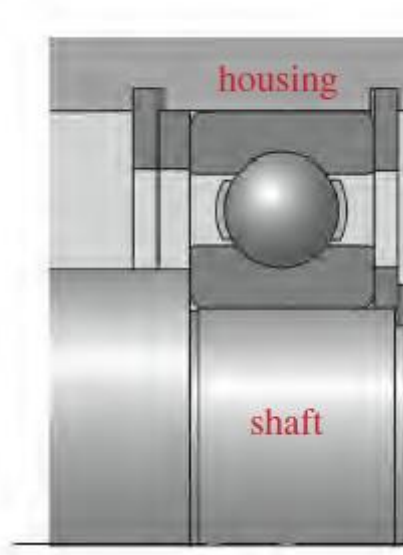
Detailed view of a REB in the context of a machine assembly. The inner race rotates with the shaft, while the outer race and housing do not. The rolling elements of the bearing allow for relative motion between the inner and outer races [3].
